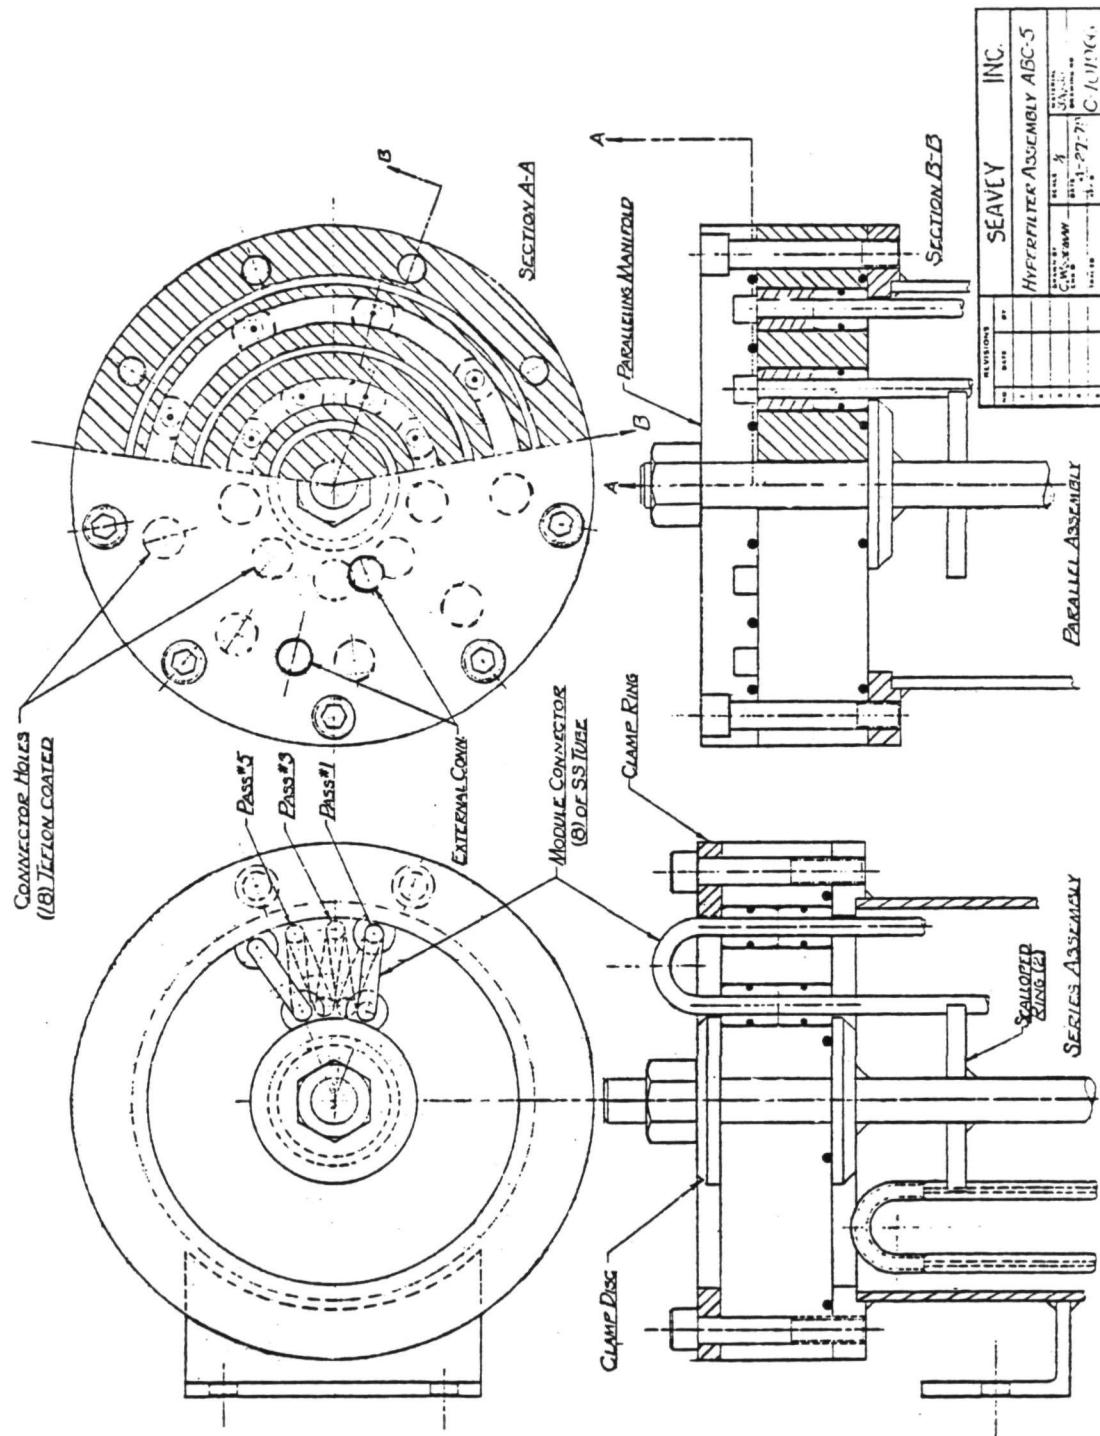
SCHEMATIC OF SERIES AND PARALLEL HEADER ASSEMBLIES FOR MULTI-TUBE MODULE
